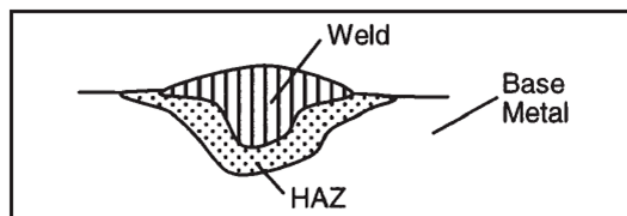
Three zones created by one weld bead (Blodgett et al. 1999)
